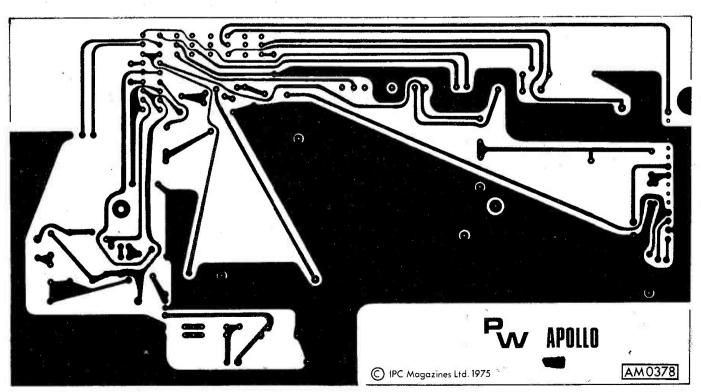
Half scale printed circuit master of the mother board. The three smaller boards and the tunerhead are mounted on this board.
